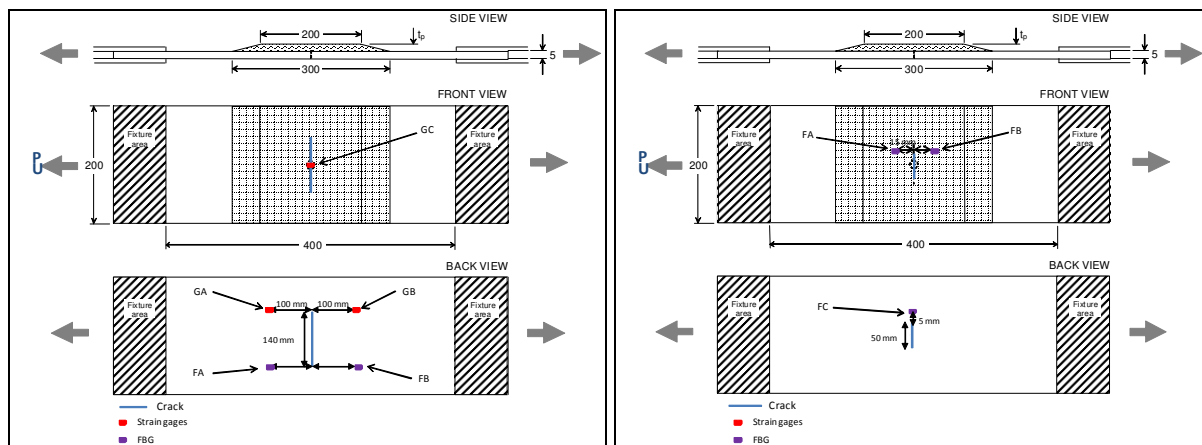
Dimensions of specimens and artificial crack positions. Left: Static test, Right: Fatigue test.
